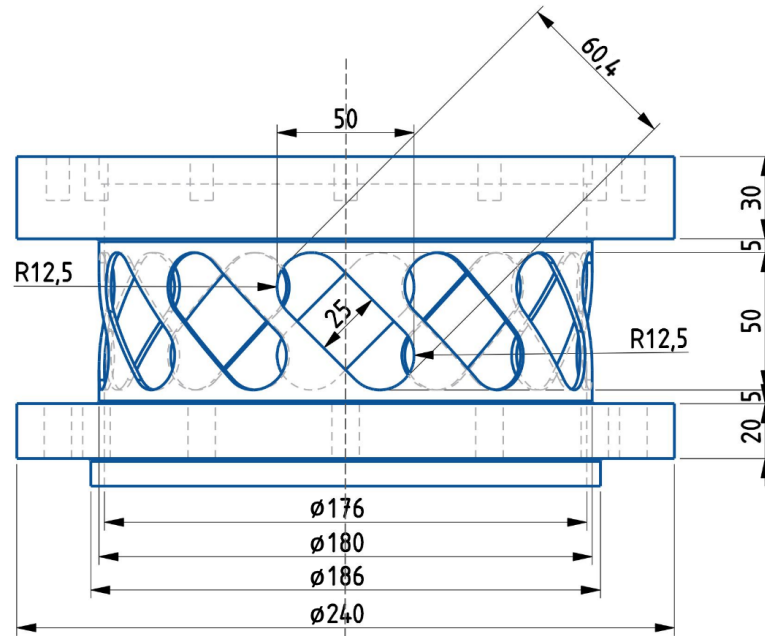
Design of the experimental version of the ATMD with dimensions in millimeter.
